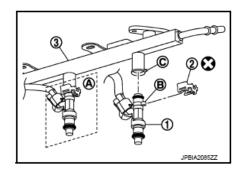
Locating Fuel Injector, Fuel Tube, Protrusion And Clip Mounting Groove Courtesy of NISSAN NORTH AMERICA, INC.
